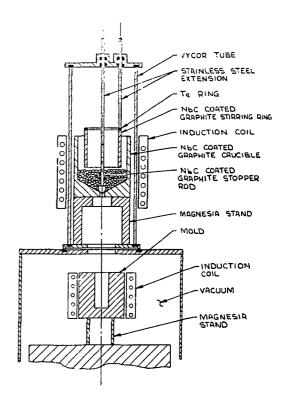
Conventional vacuum furnace for preparing U-Pu-Zr alloy castings.
